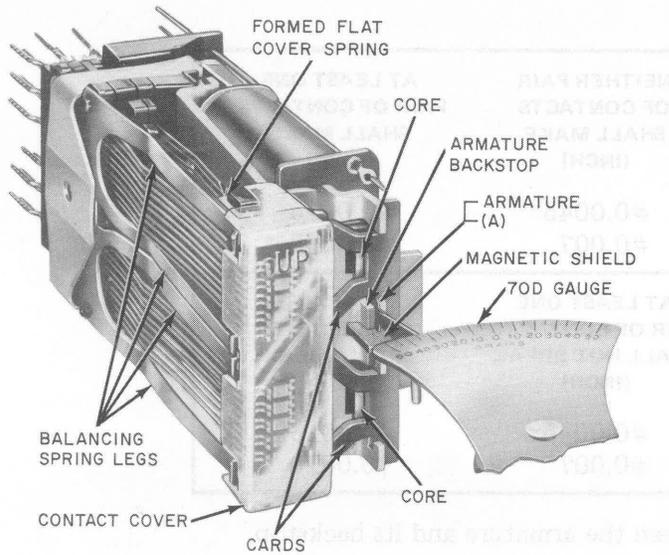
AK-Type Relay Having Formed Flat Cover Spring
